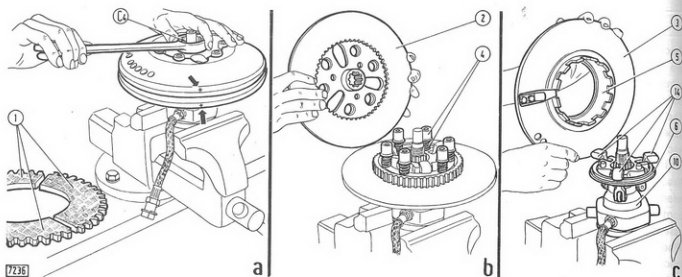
Dismantling (or Reassembling) the Single Plate Clutch Assembly
